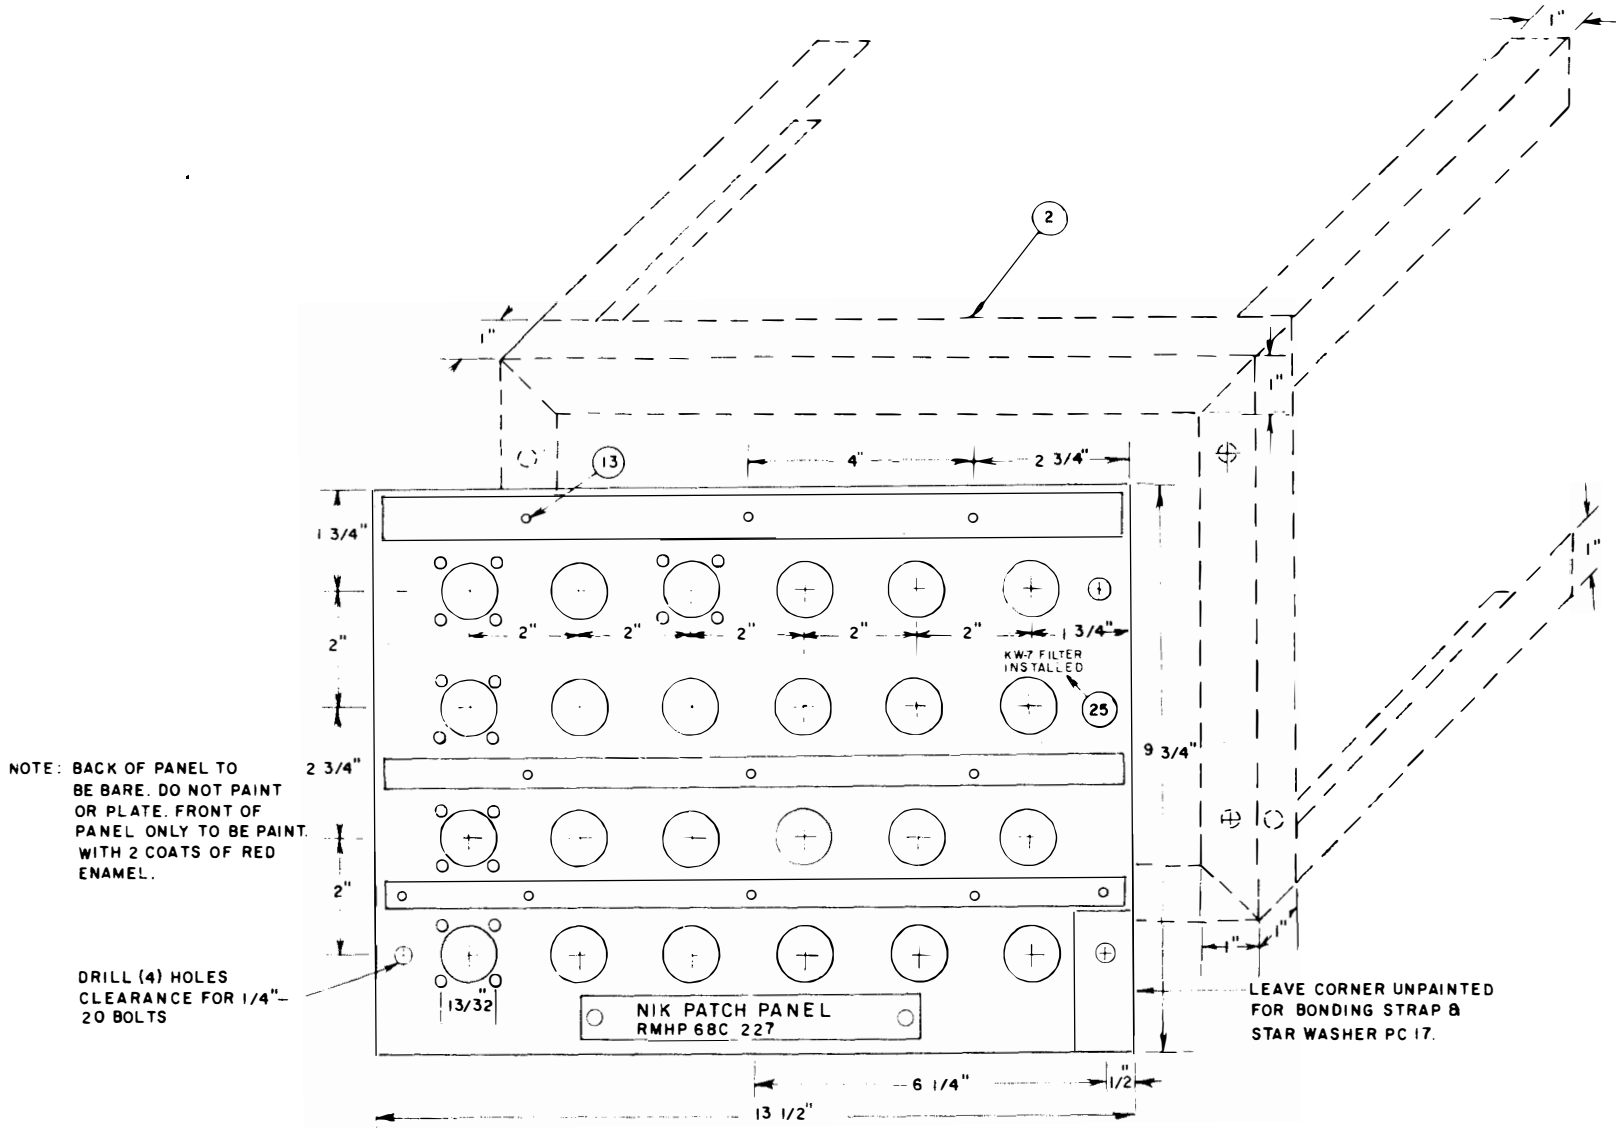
SB-3176/UGQ Installation Drawing (Part 2)
